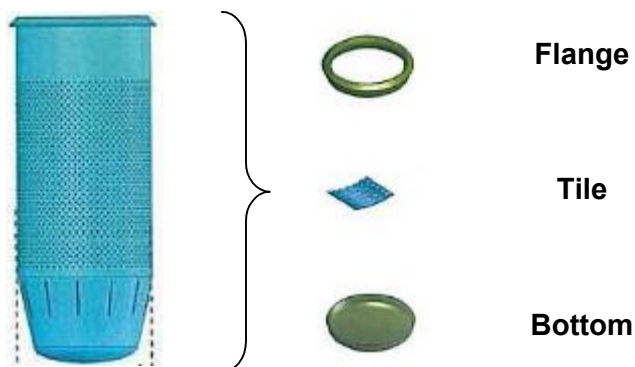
Pieces of the baskets (bottom plate, sidewall tiles, and upper flange)
